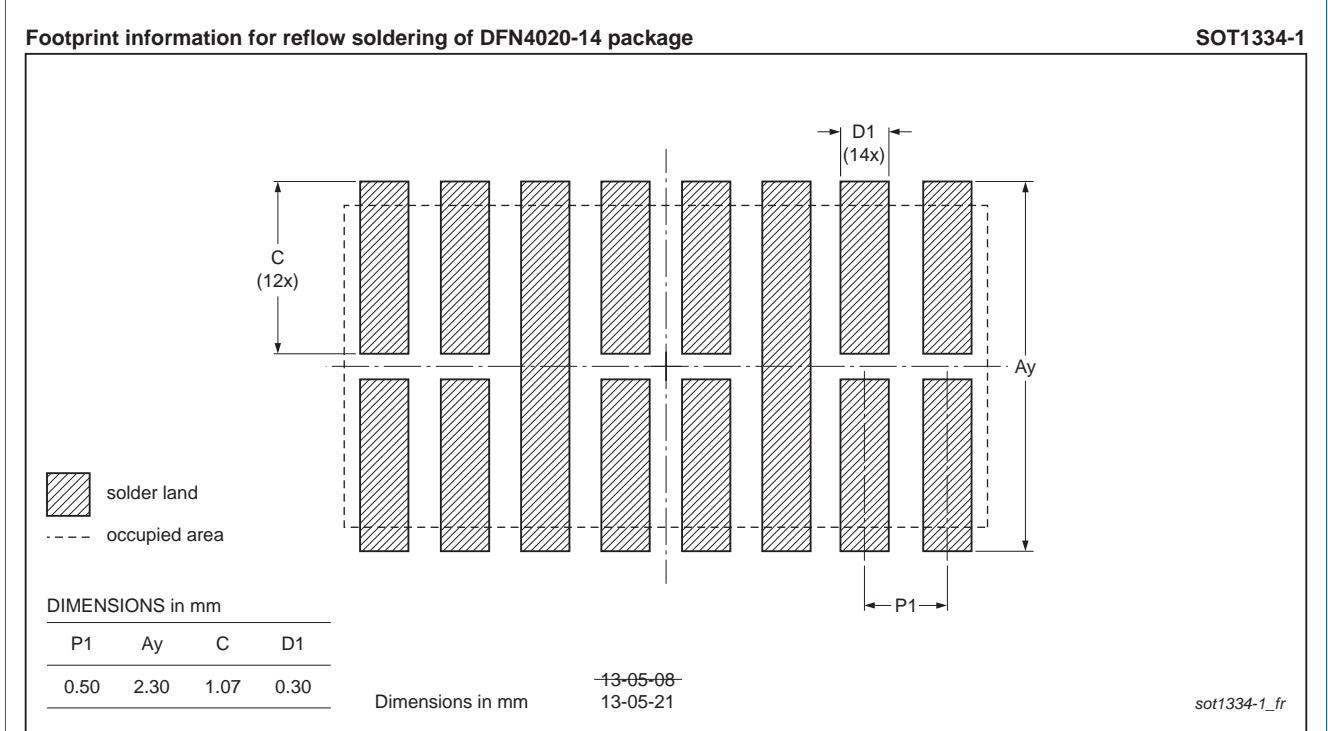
Reflow soldering footprint DFN4020-14 (SOT1334-1)
